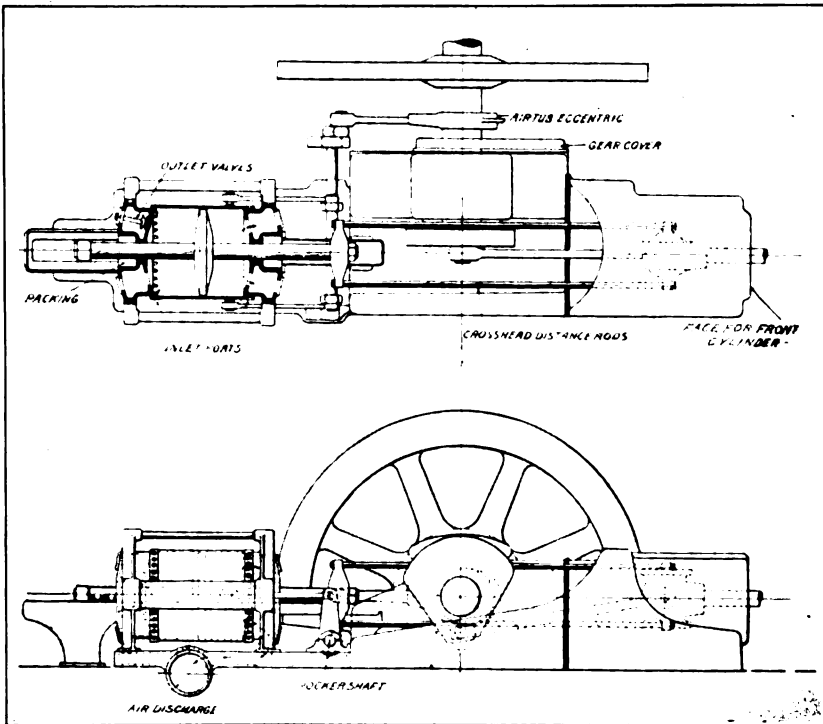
BLOWING TUB WITH MOVABLE CYLINDER (SLICK'S DESIGN) BUILT BY WESTINGHOUSE MACHINE COMPANY
